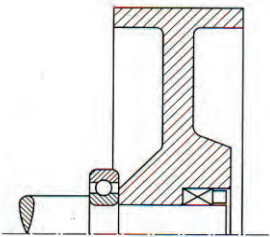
Flywheel mounted using one GSN 7012 locking assembly.
